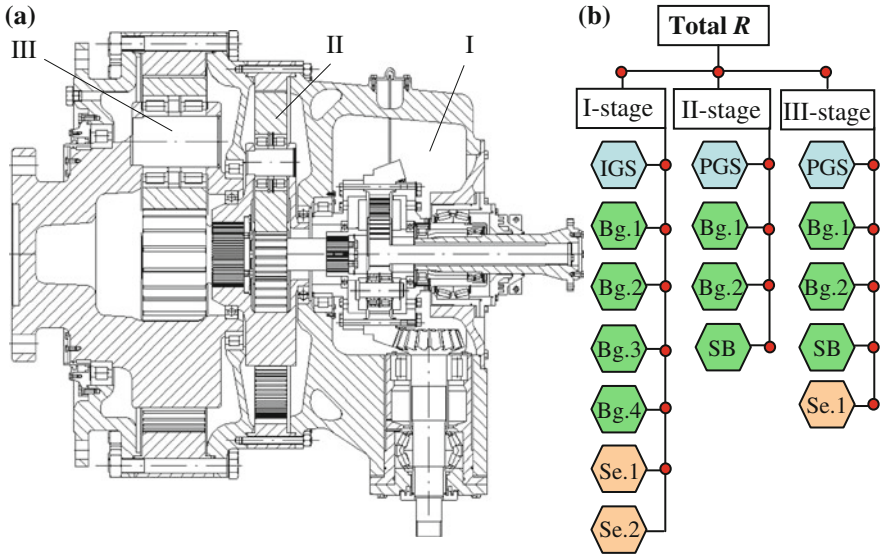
Planetary gear drive unit of the wheel of bucket wheel excavator. a Gear drive drawing. b Structure of elementary reliability—reliability tree
